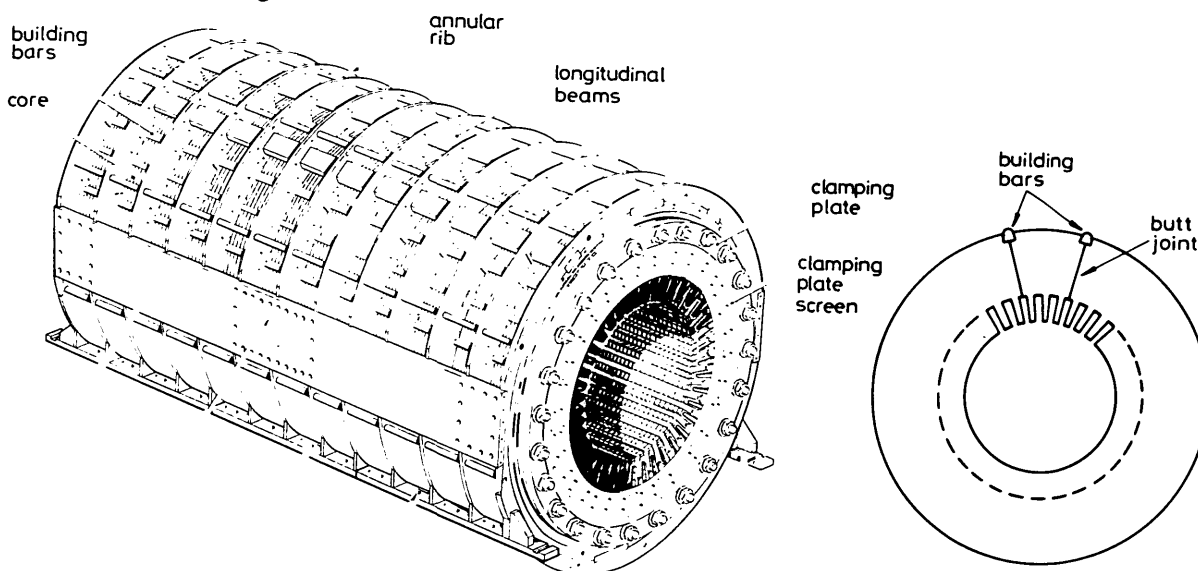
Arrangement of typical 660 MW alternator stator core showing inner frame and building bars and construction of segmented core
